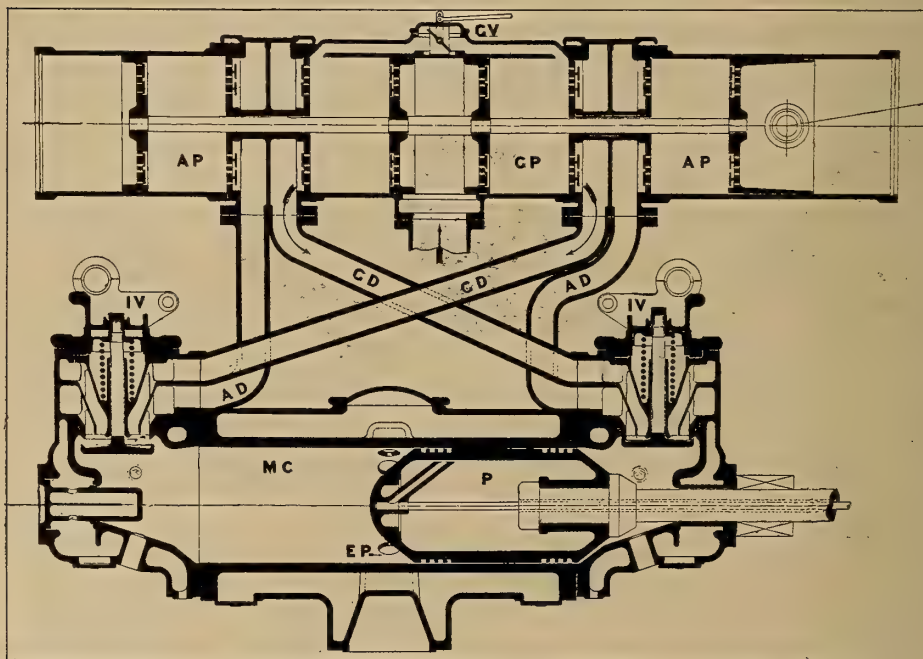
ARRANGEMENT OF CHARGING PUMP OF THE STALEY MILL ENGINE. MATHER & PLATT, LTD.
